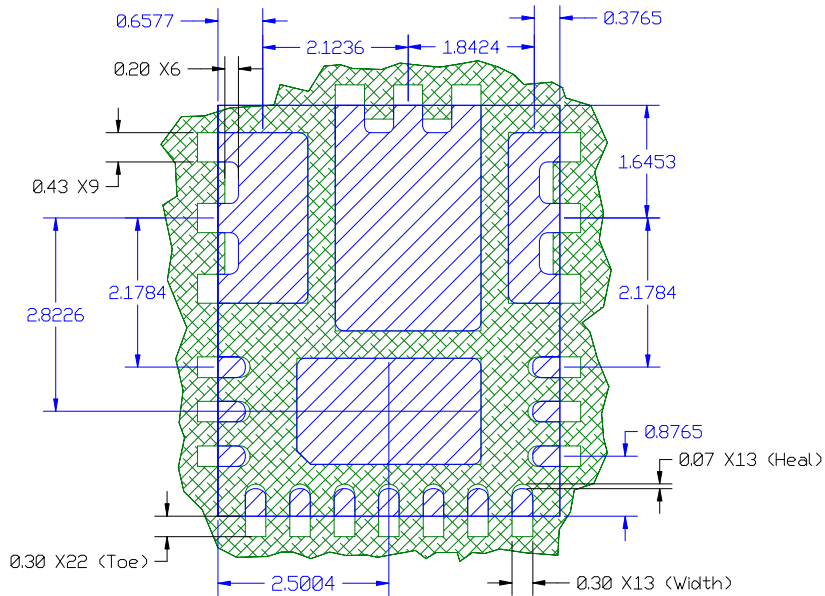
PCB Metal Pad Sizing and Spacing (all dimensions in mm)
